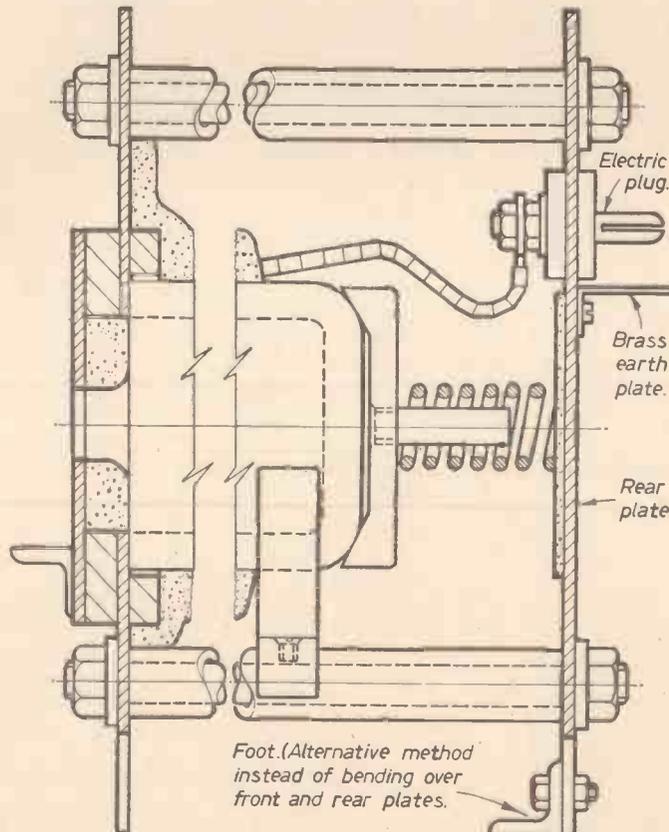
Sectional view of the front and rear ends of the furnace.
